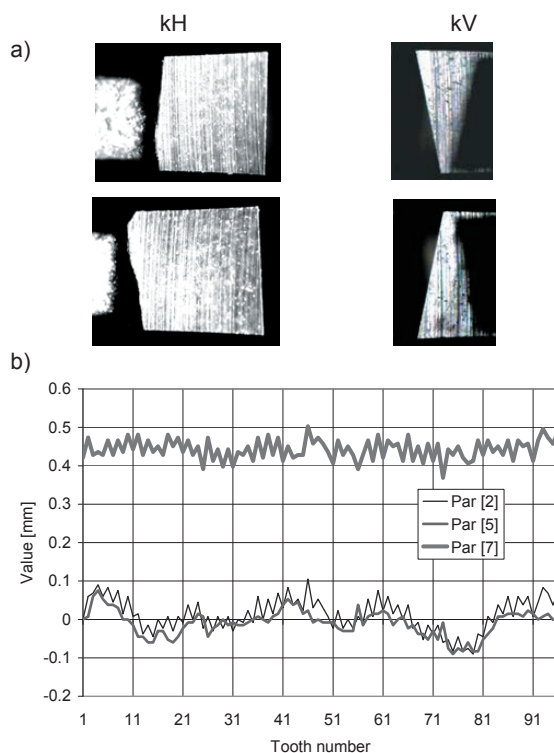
Measurement results of the 96 teeth of the circular saw with alternating skew tooth shapes, where:
